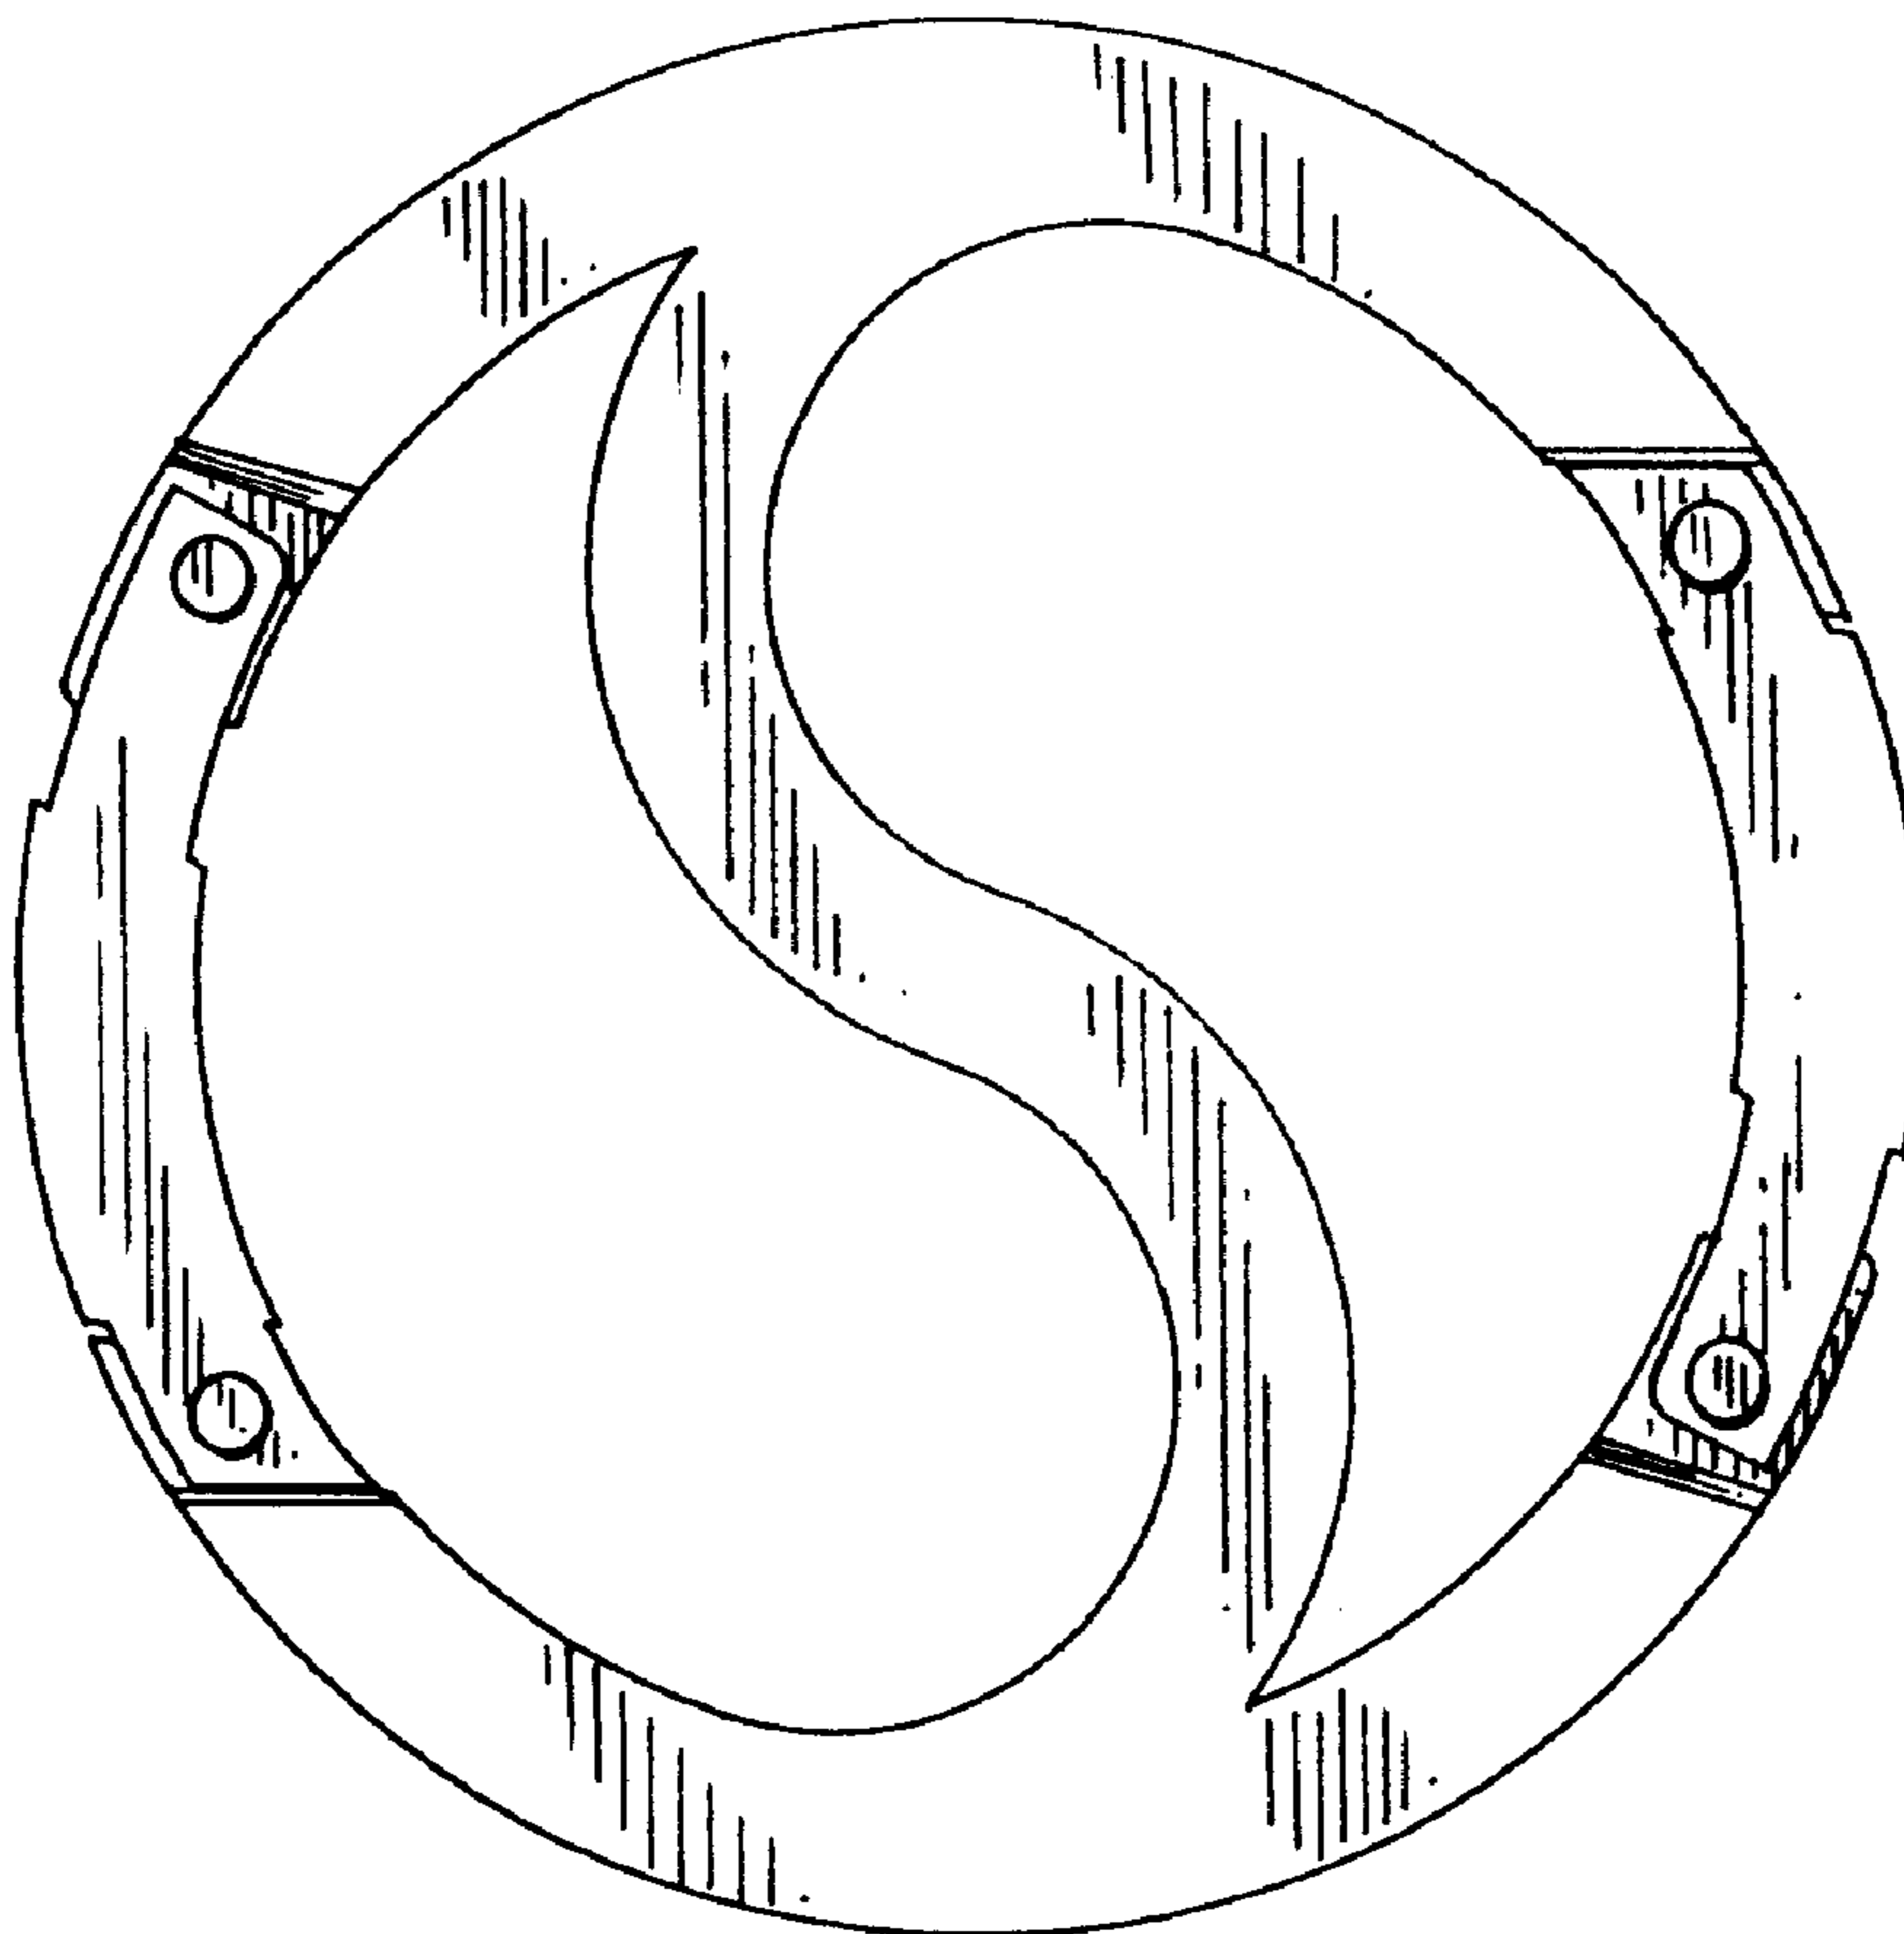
is a side plan view of the left side carabiner shown in FIG. 1.
